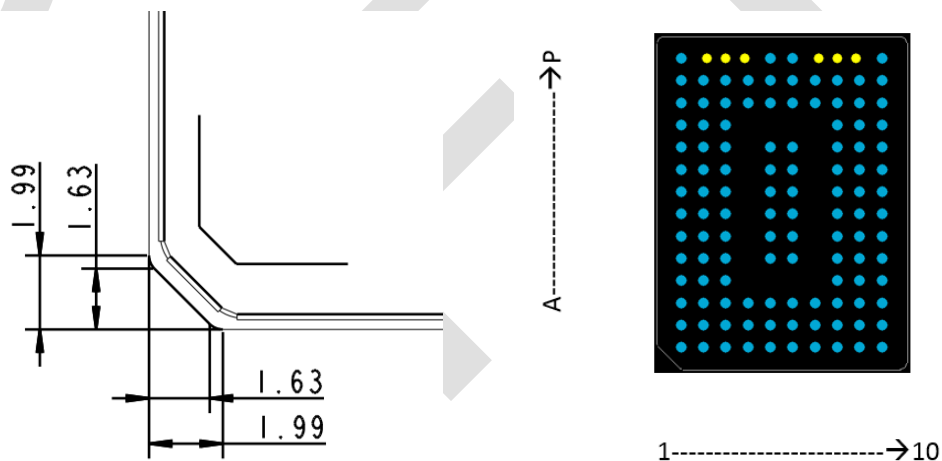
shows the dimensions of the ME309-562 module in details.
